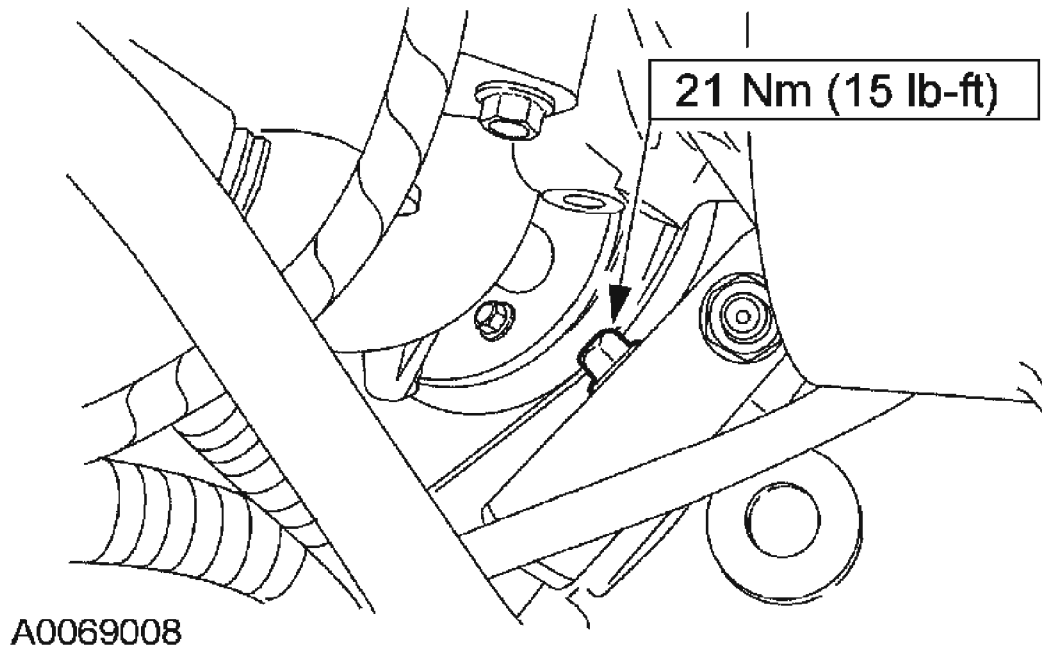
Installing Manifold And Tube Assembly Onto A/C Compressor
